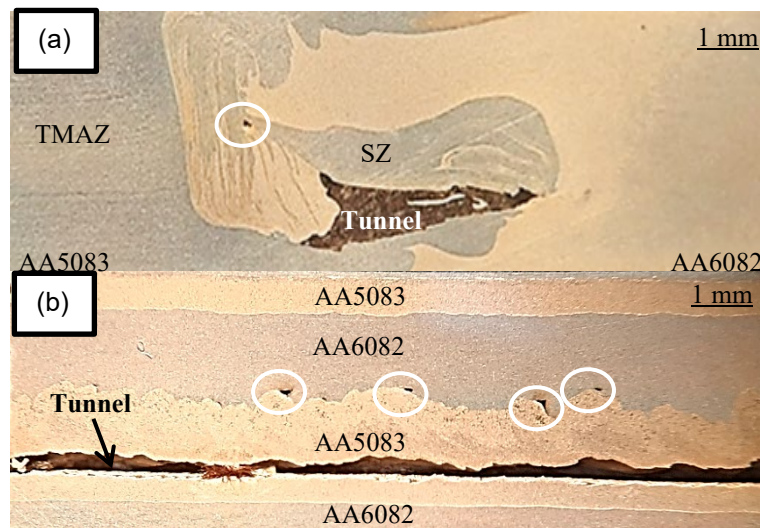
Macrographs, (a) FS welded transverse and (b) FS welded longitudinal samples.
